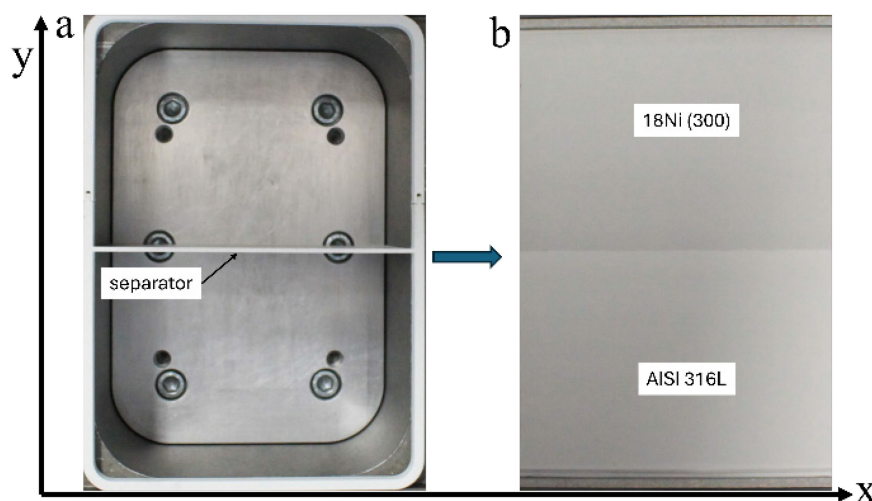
(a) Powder loading chamber with the separator inserted into it; (b) Appearance of the two powders after separator extraction.
